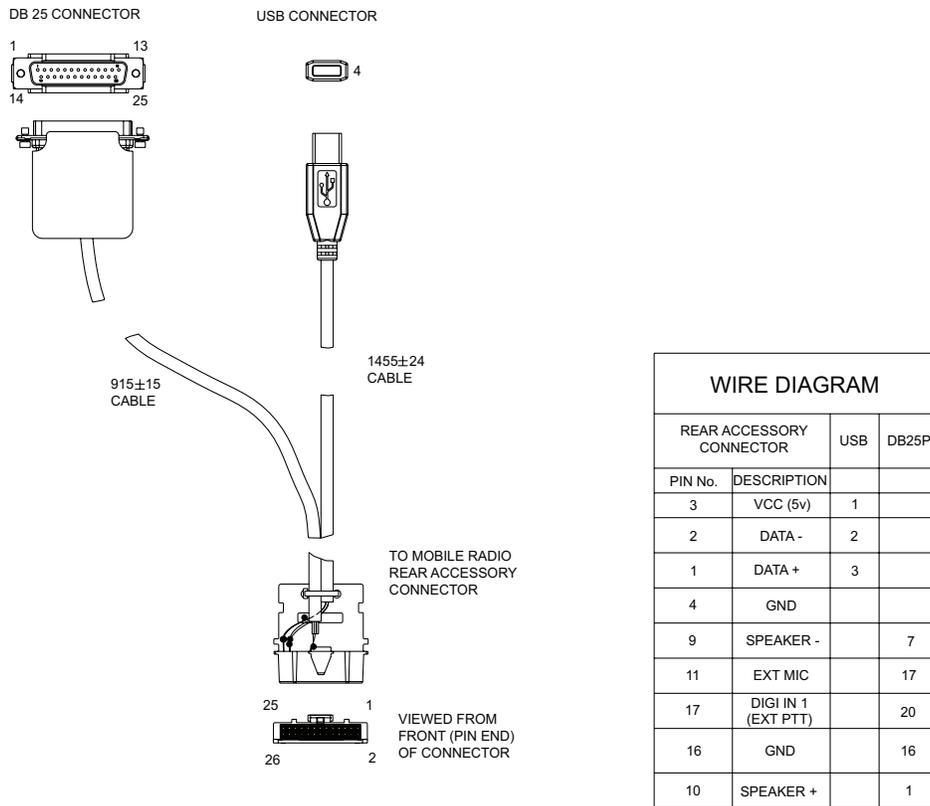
Mobile & Repeater Rear Accessory Programming and Test Cable PMKN4016
